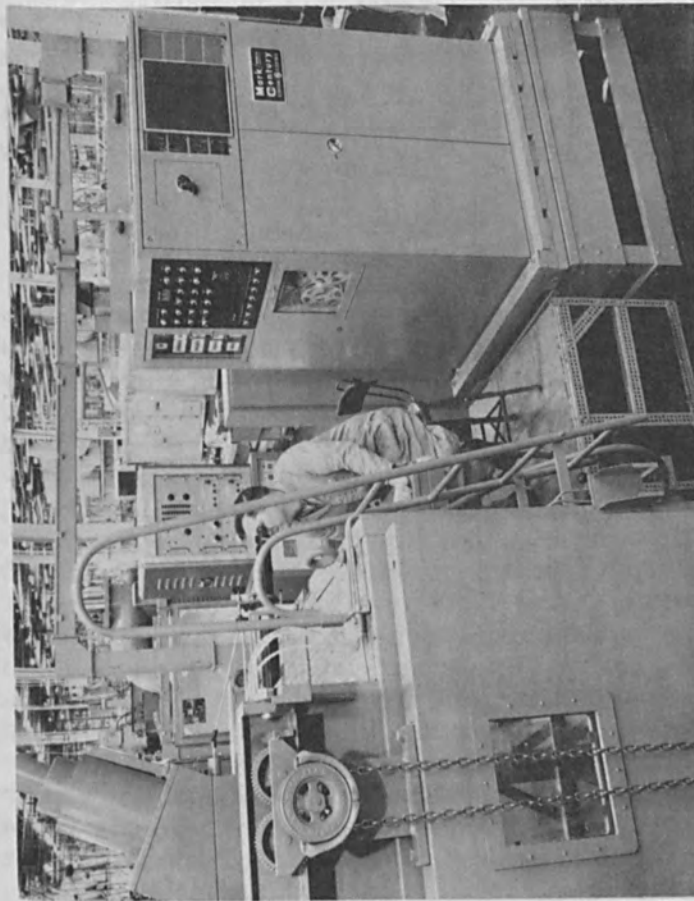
Tape Controlled Electron Beam Welder.
